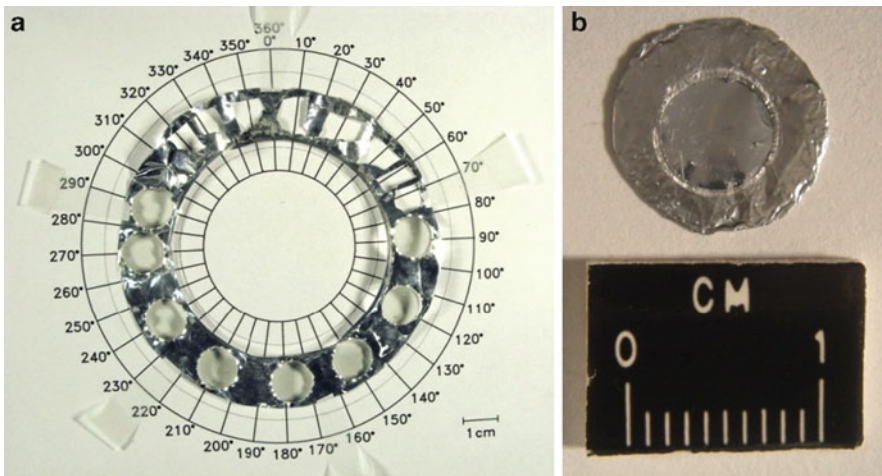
(a) Weld 15 side B after sectioning of 16 test samples at specified angles, and (b) an irregularly shaped sample from Weld 15 side A in its Al holder
